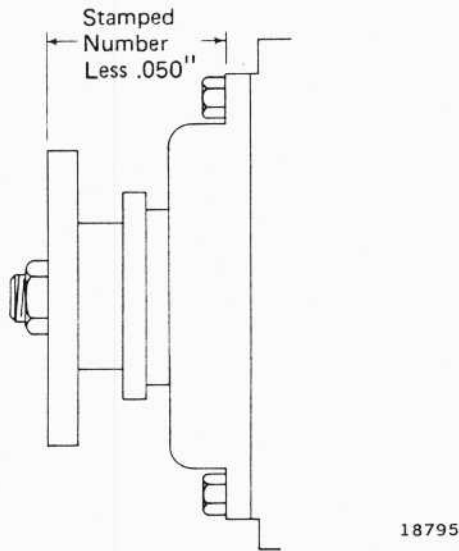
Generator Blower Drive Thrust Measurement (Single Stamped)
